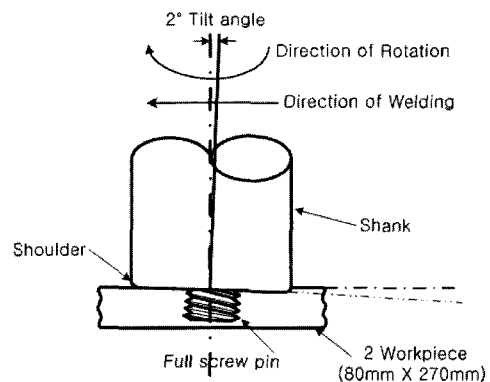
A typical tool, tilt angle and direction of rotation and welding for FSW
